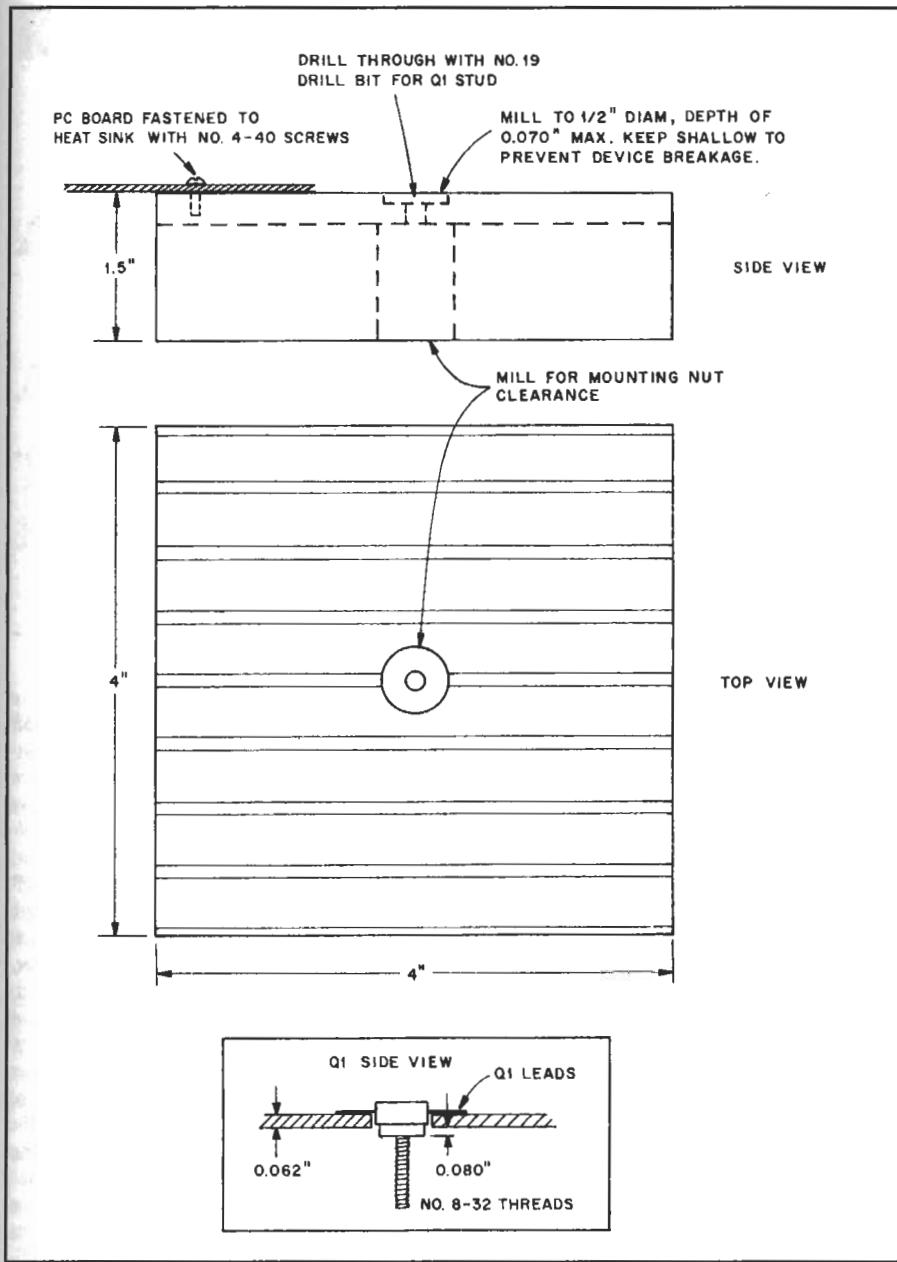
Heat-sink drilling dimensions for the VHF amplifiers. Overall heat-sink size isn't critical, but should be close to the dimensions shown. As an alternative to milling the heat sink to accept Q1, a piece of $\frac{1}{16}$ -in. double-sided PC-board material can be used as a shim. Be careful not to stress the transistor lead-to-body connections during mounting.
